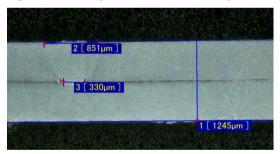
Picture of weld without gap, with 1 mm defocus
